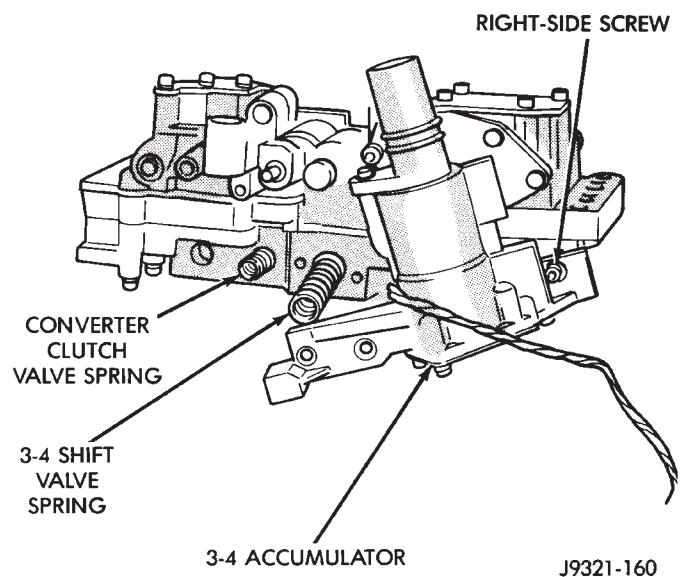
Converter Clutch And 3-4 Shift Valve Springs
